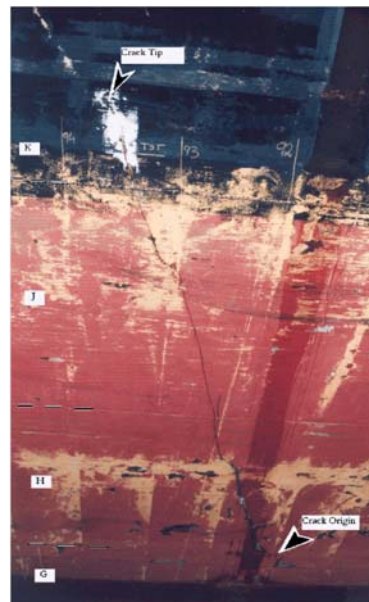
Cleavage fracture of Lake Carling [6].
